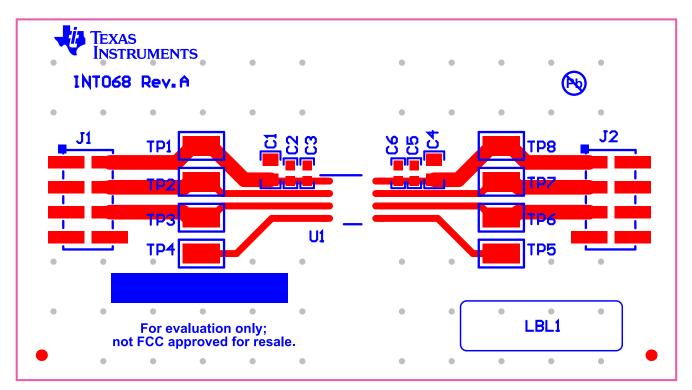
ISO77xxD/ISO70xxD PCB Layout
